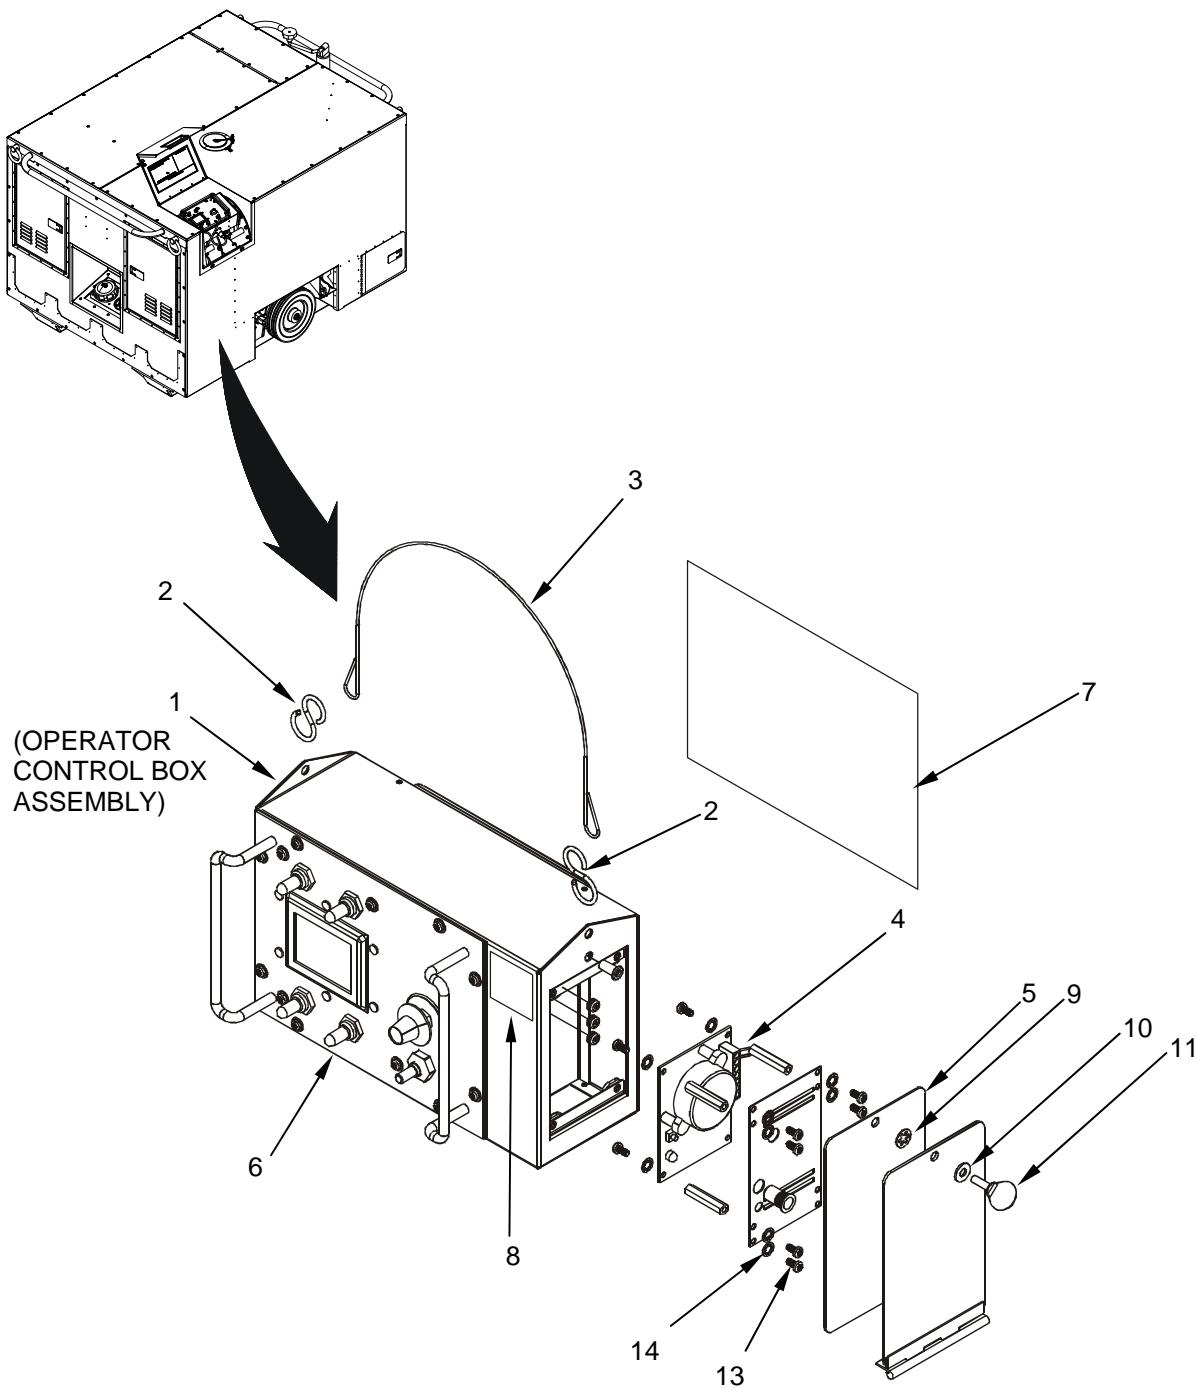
Assembly, Operator Control Box (Sheet 1 of 2).
